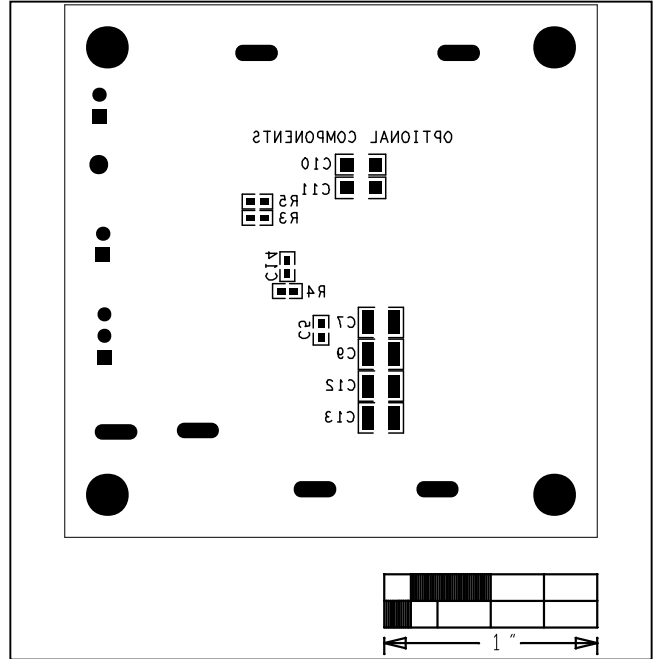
MAXM17504 EV Kit Component Placement Guide—Solder Side
